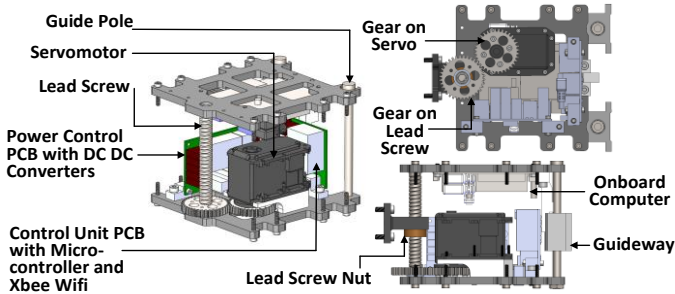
CAD Model of the VTU showing leadscrew and nut assembly as well as all electronics.
